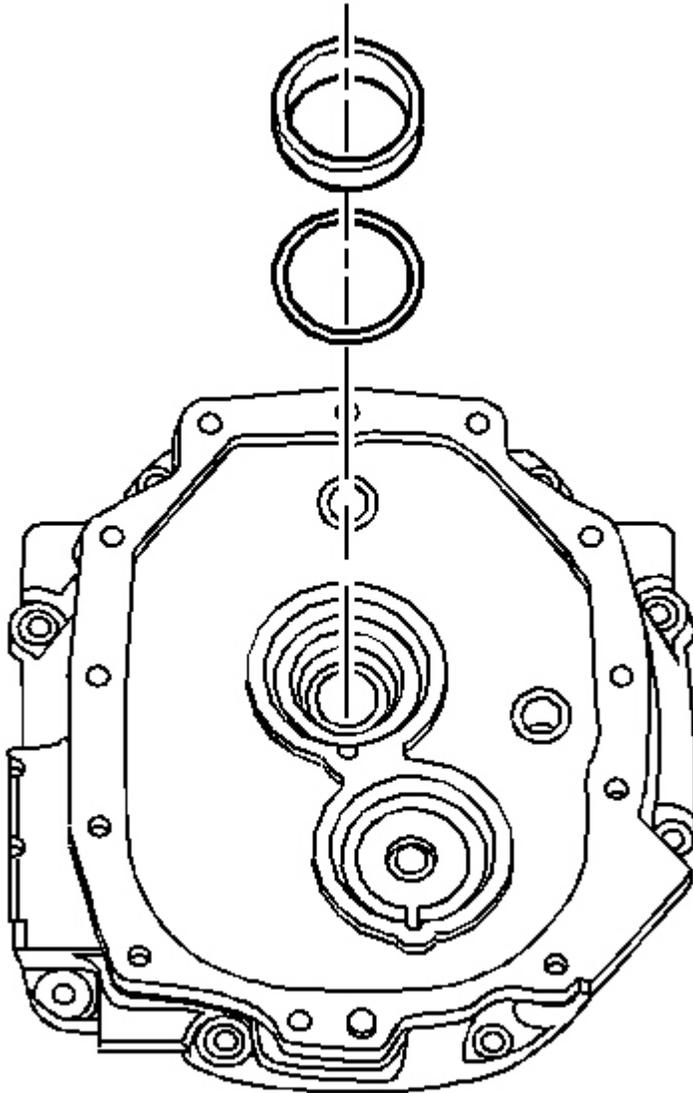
Installing/Removing Input Shaft Bearing Shim And Bearing Race
